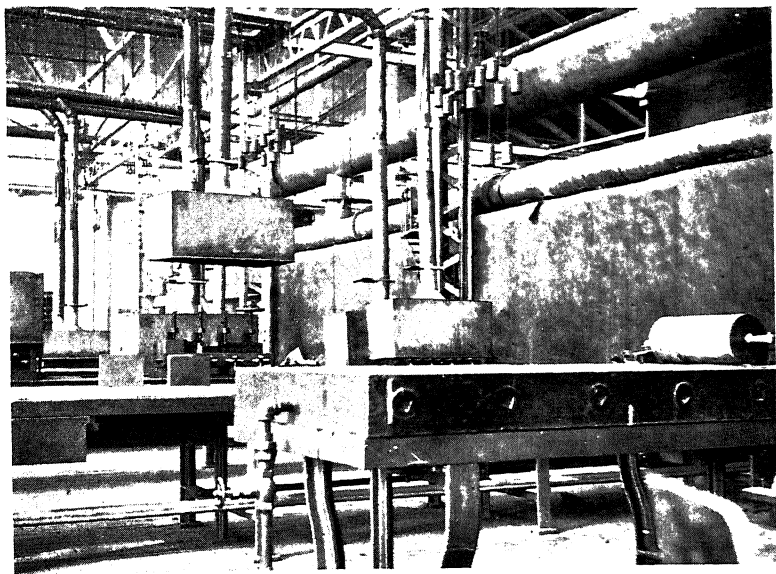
Plate and Roller employed in Manufacturing Micanite Sheets.
